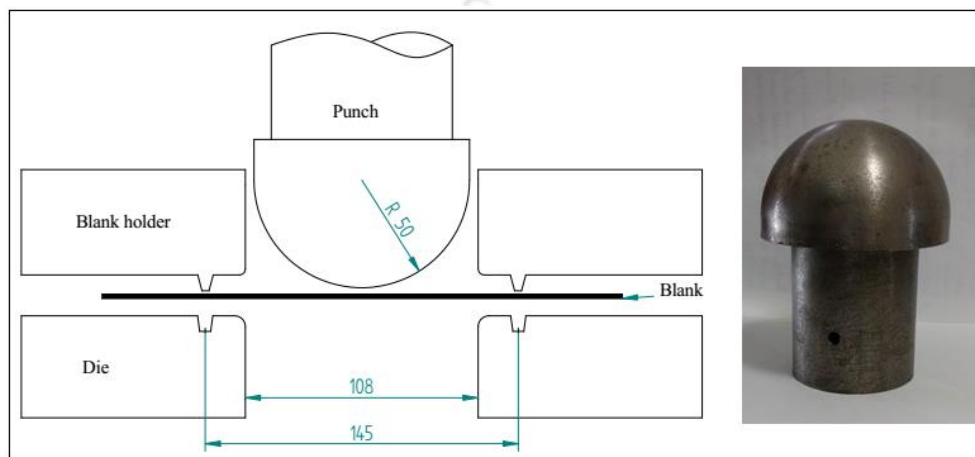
Die and tool parameters for conventional LDH test with the image of actual punch used.
